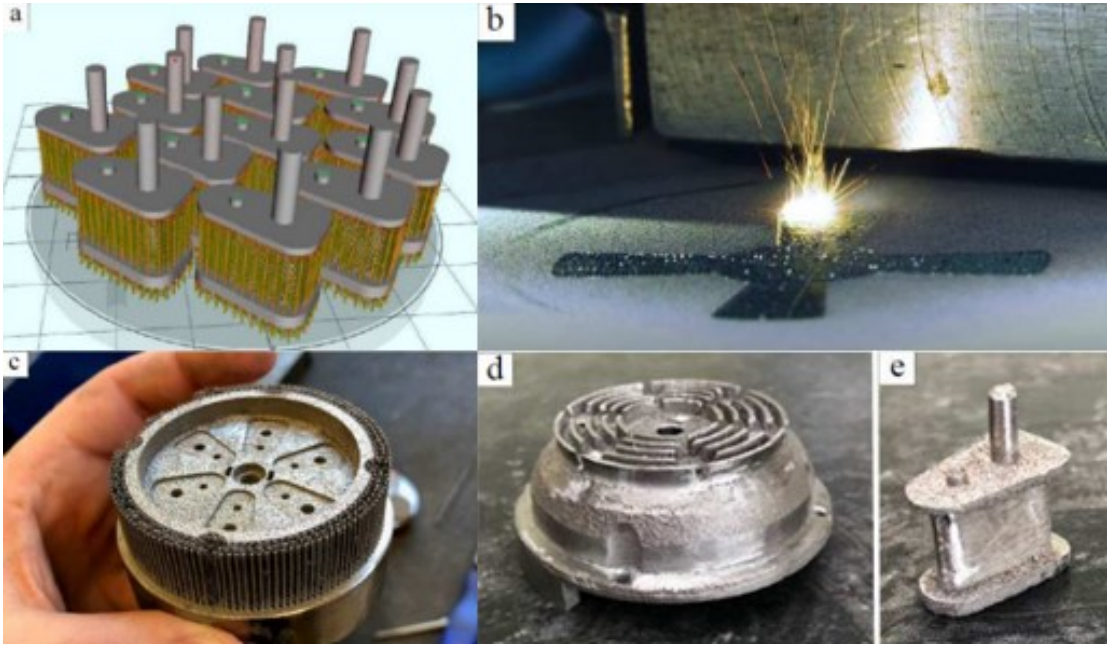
(a) Layout of the Printed Stator Teeth Arranged on the Build Plate in Printing Pre-Processing [51], (b) SLM Printing Process of the Machine Rotor [51], (c) Stator Half of the Machine on Build Platform Just After Printing [51], (d) Post-Processed Stator Half with the Support Structure Removed [51], (e) Post-Processed Stator Tooth [51]
